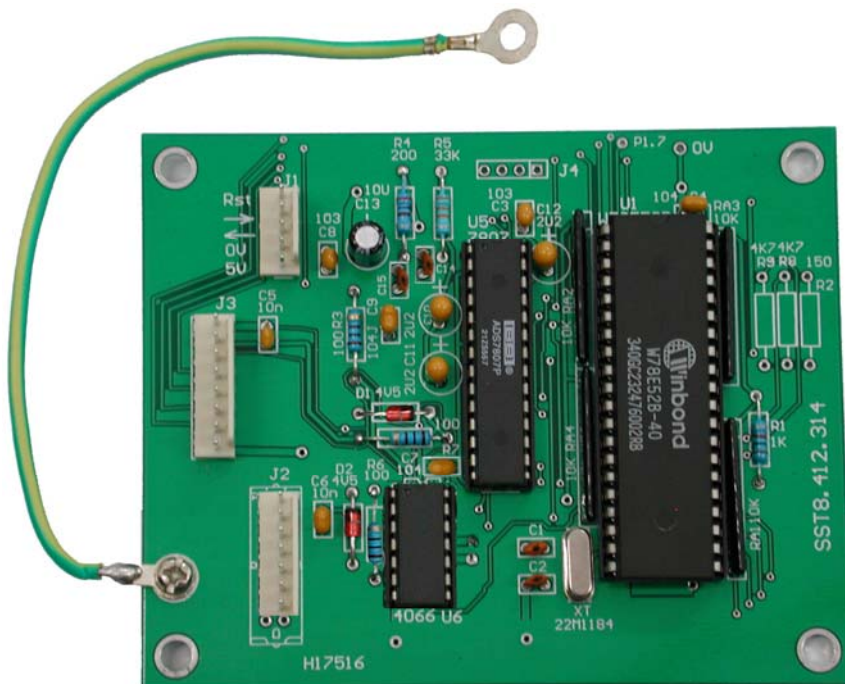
Layout of UV-3802 Slave CPU PCB
